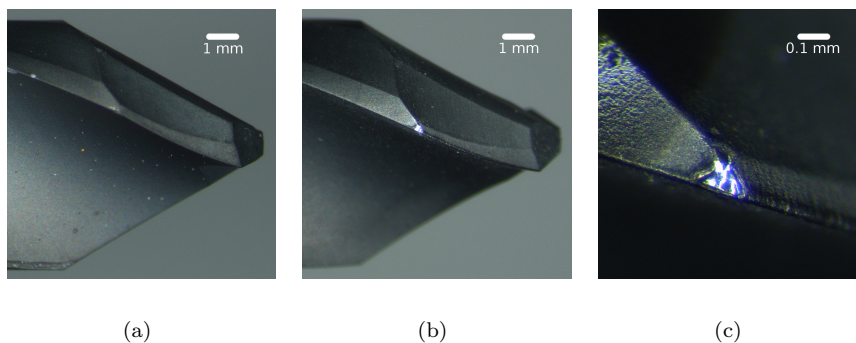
New tool designed for CFRP drillings (a), same tool after 130 12mm deep drillings in CFRP (b), zoom on the corner wear zone (c)
